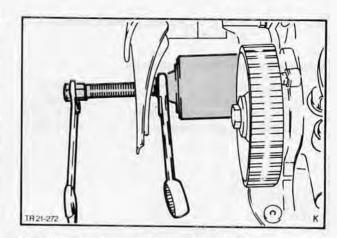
Fit oil seal, using Special Tool 21-009-A
